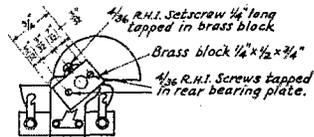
DETAIL OF THE ROTOR LOCK FOR THE MC-100-M TANK CONDENSER
